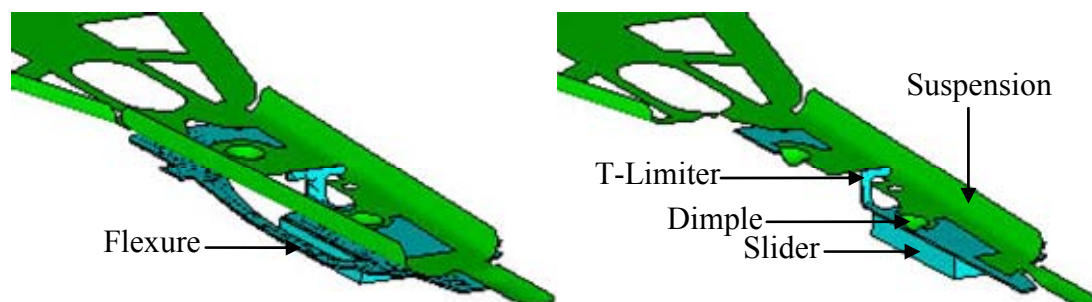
HEAD-GIMBAL ASSEMBLY DEVICE I
